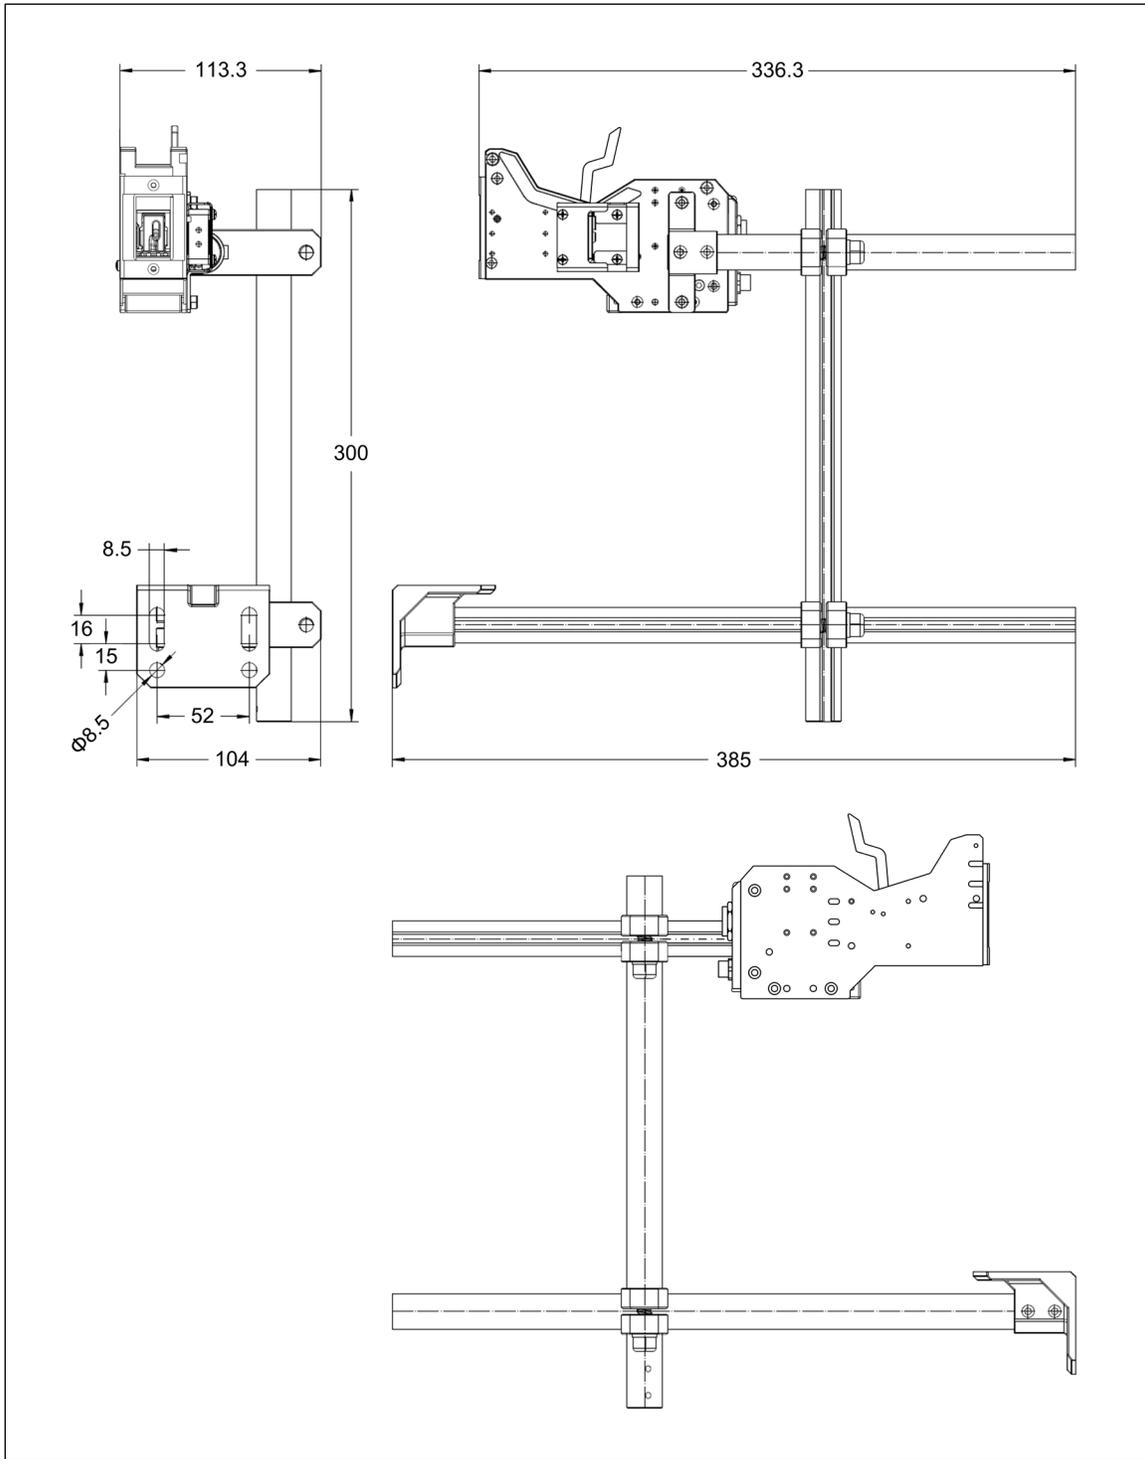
HI-Pro Printhead and Brackets Dimension
